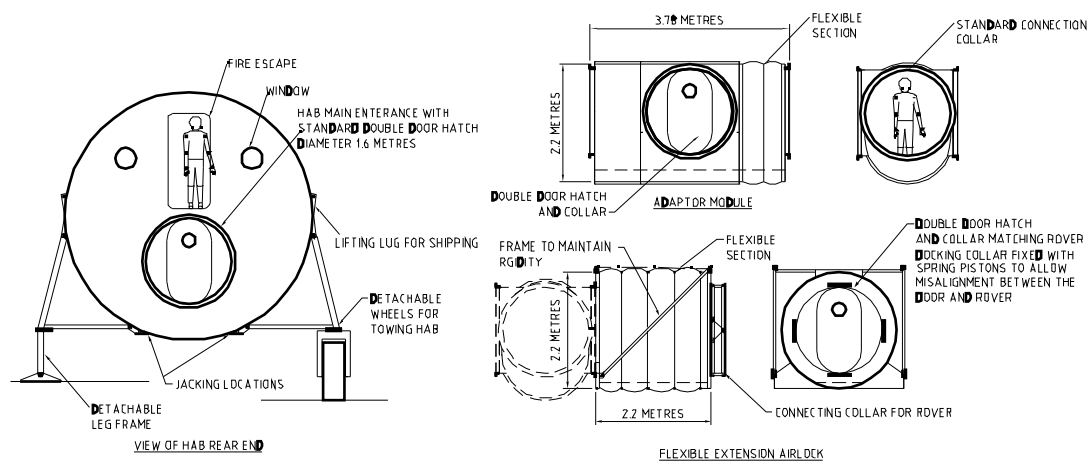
View of Hab rear, adaptor module and flexible extension airlock
